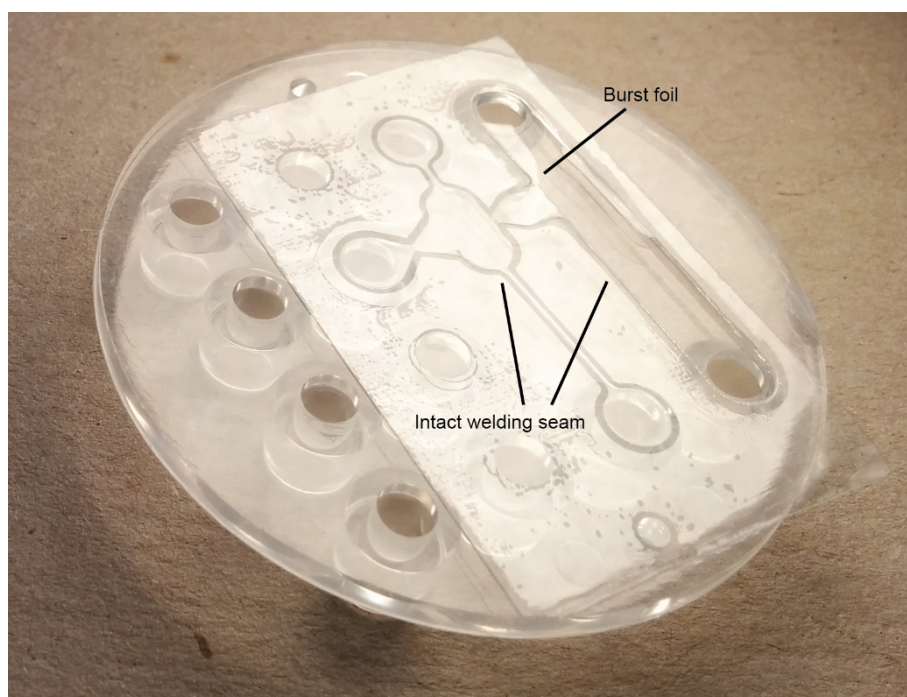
Chip failure during pressure testing. To investigate the bonding strength of the welding seams pressurised air was applied to the chip inlet, while the other connectors were blocked. Design A1 failed after applying 3.5 bar (see photograph). The mode of failure was bursting of the 152 μm thick foil. Note that the welding seam is intact, as is visible by the darker surface. Design A2 with the 500 μm thick foil did not fail within the testing limits, which was up to 8.5 bar.
